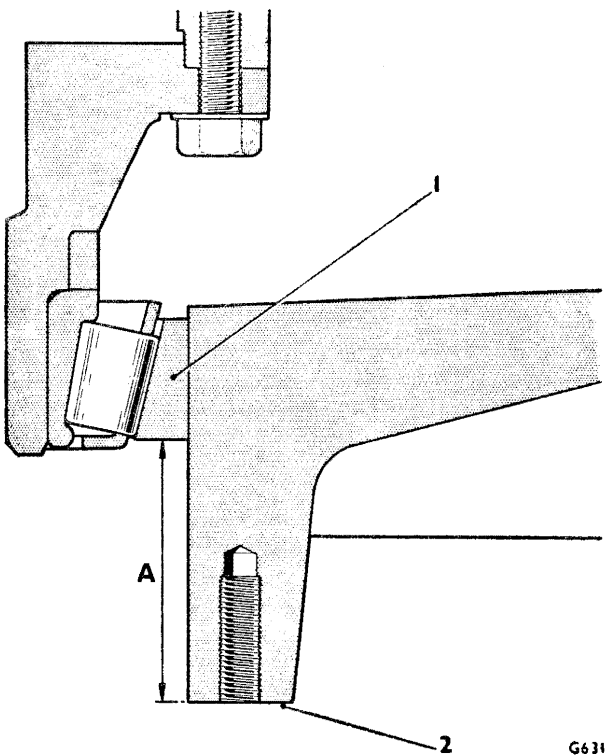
MEASUREMENT—CASING FLANGE TO BEARING
